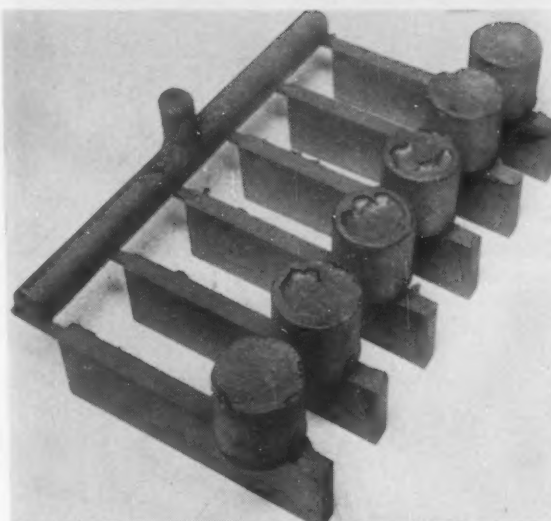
Cast test pieces require no machining. Riser location minimizes segregation in center.
